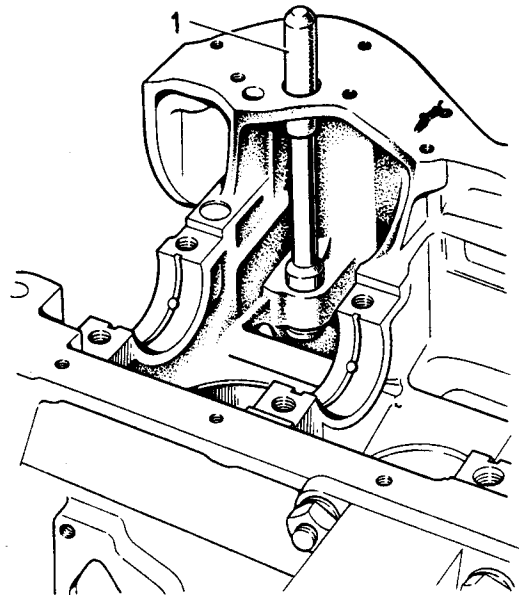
Pressing Out Oil Pump and Ignition Distributor Drive Gear Bush:
